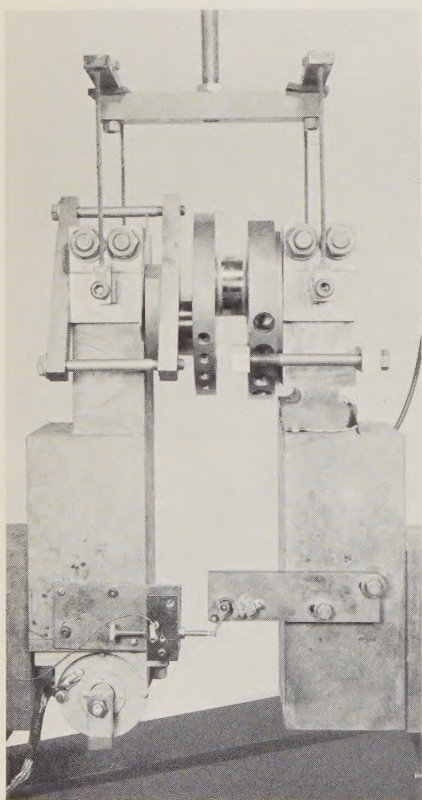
Shown here is the fixture used to perform a bending fatigue test on a crankshaft section. Two pendulum weights were fastened to the crankshaft section and the whole mass vibrated by means of an electric motor with a rotating eccentric weight. Since the amplitude of vibration could be varied, the stress in the journal fillets could be increased or decreased with this test fixture.
